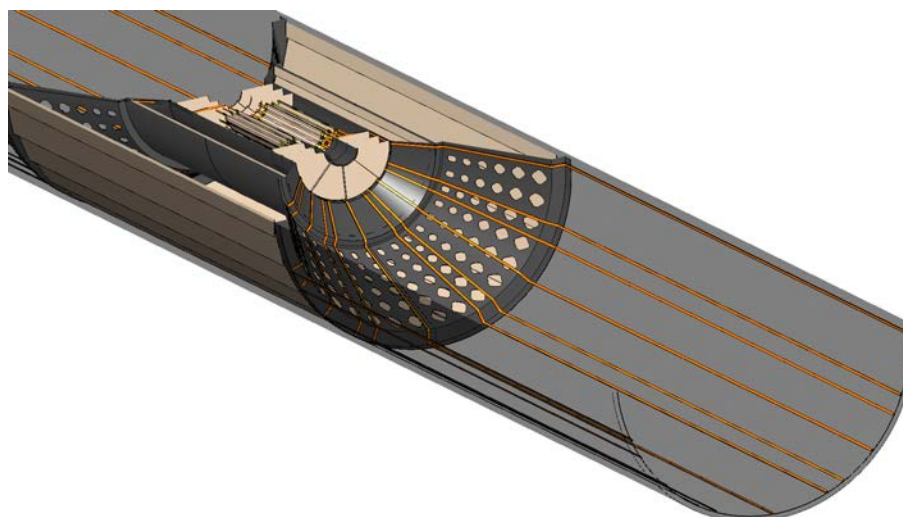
View of the combined VXEC and VXBD cabling layout in one half of the Inner Support Structure.
